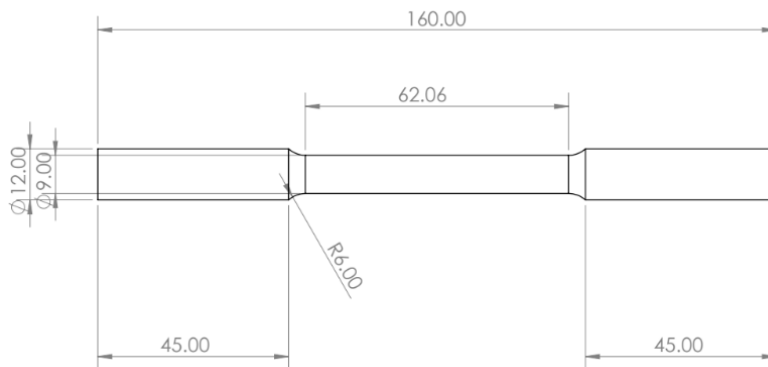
Tensile Test Specimen dimensions taken from metal mould casting.
